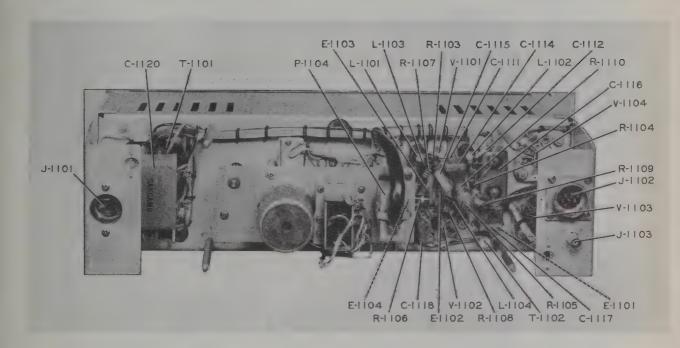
R-F Oscillator O-270/FRT-26, Rear View, Covers Removed.
